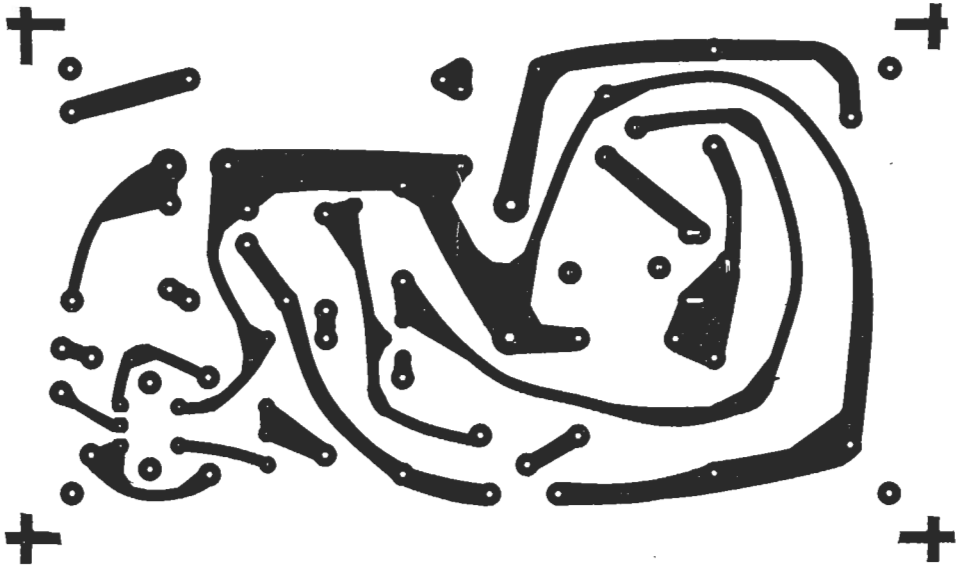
Actual-size printed circuit board. You can make the board yourself or purchase it (see Parts List). If you make your own board, drill the holes as shown.
